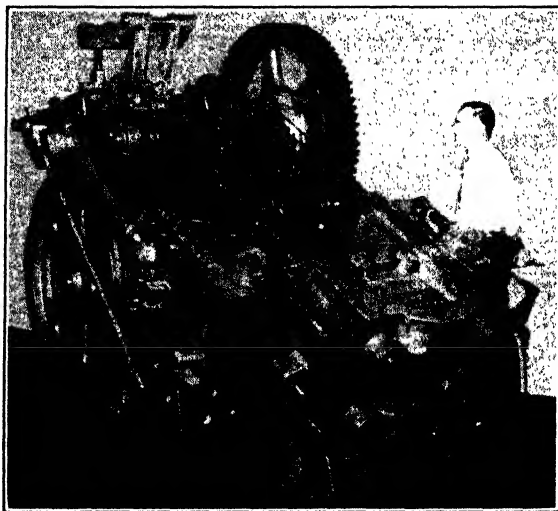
An 800 per cent improvement in man-hour production was wrought by this unit in the manufacture of $\frac{3}{8}$ -in. thick flat steel rings.
